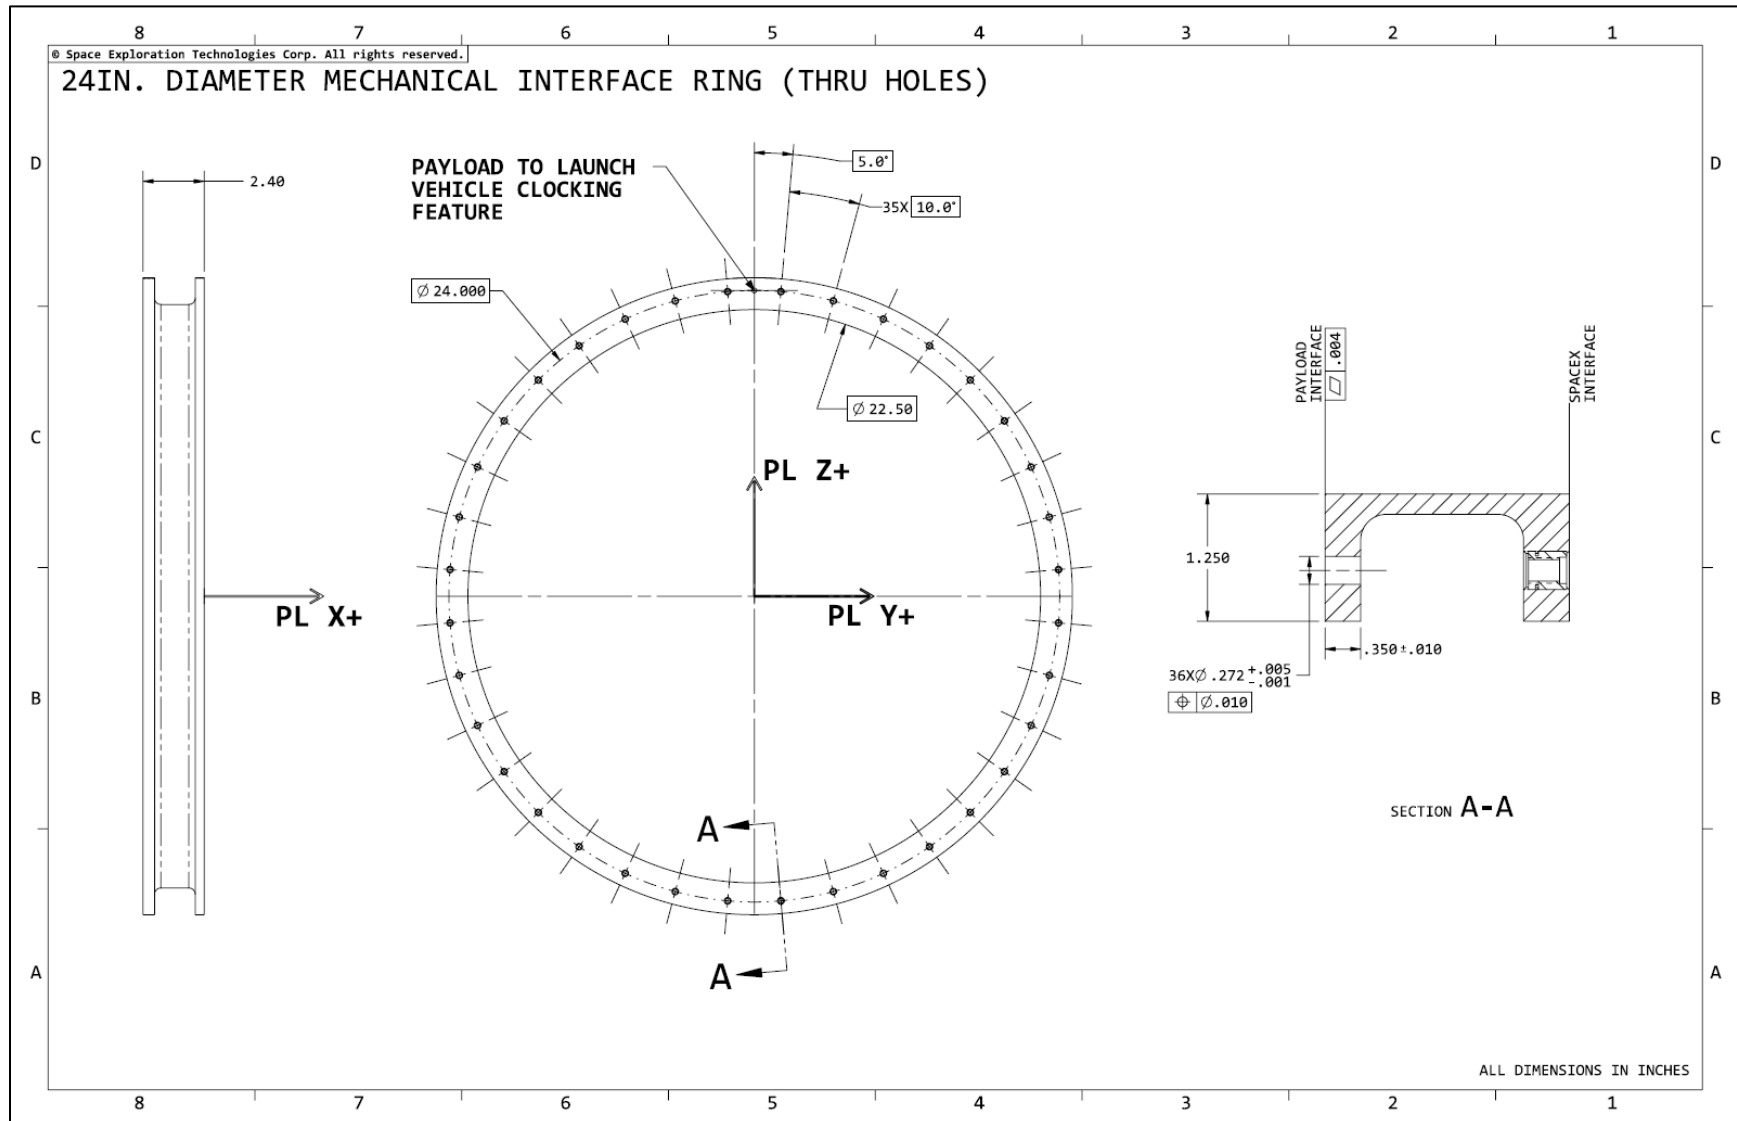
24" Diameter Mechanical Interface Ring (Thru-Holes)
